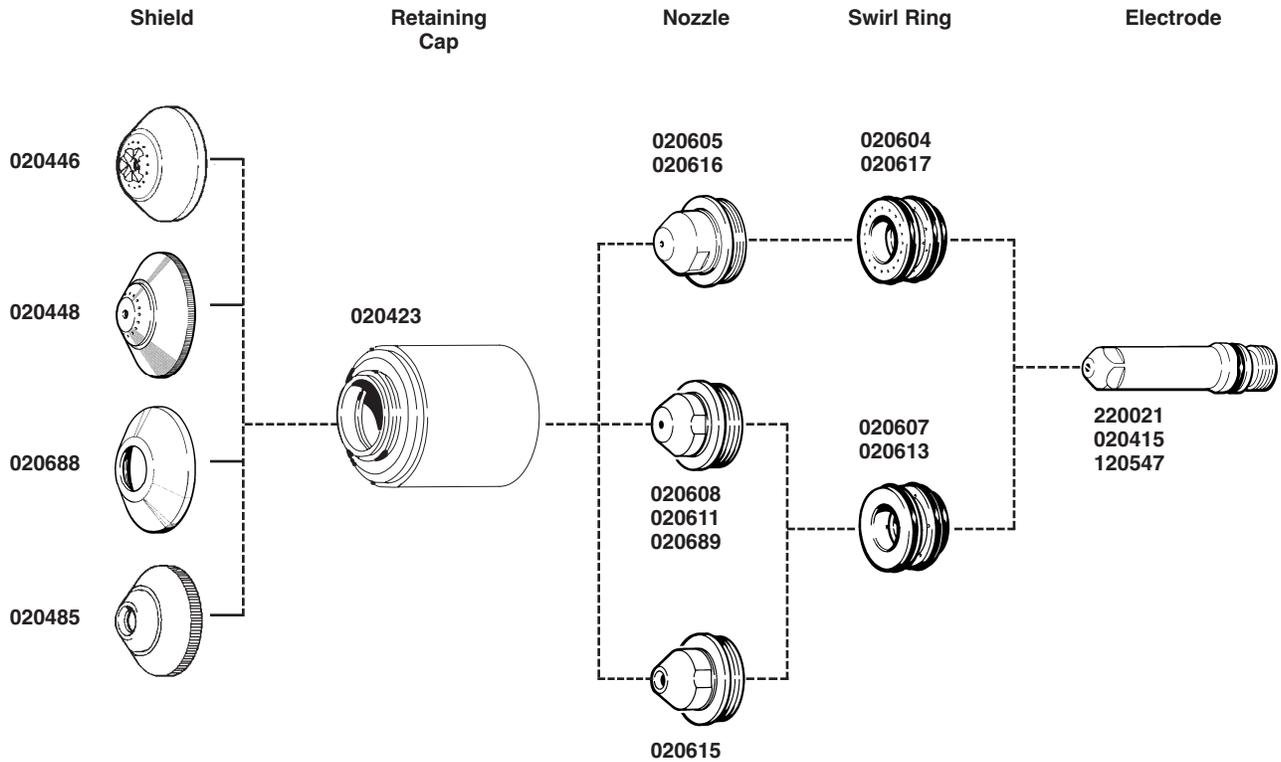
MAX200 Rev 1 Hand Torch Consumable Parts
